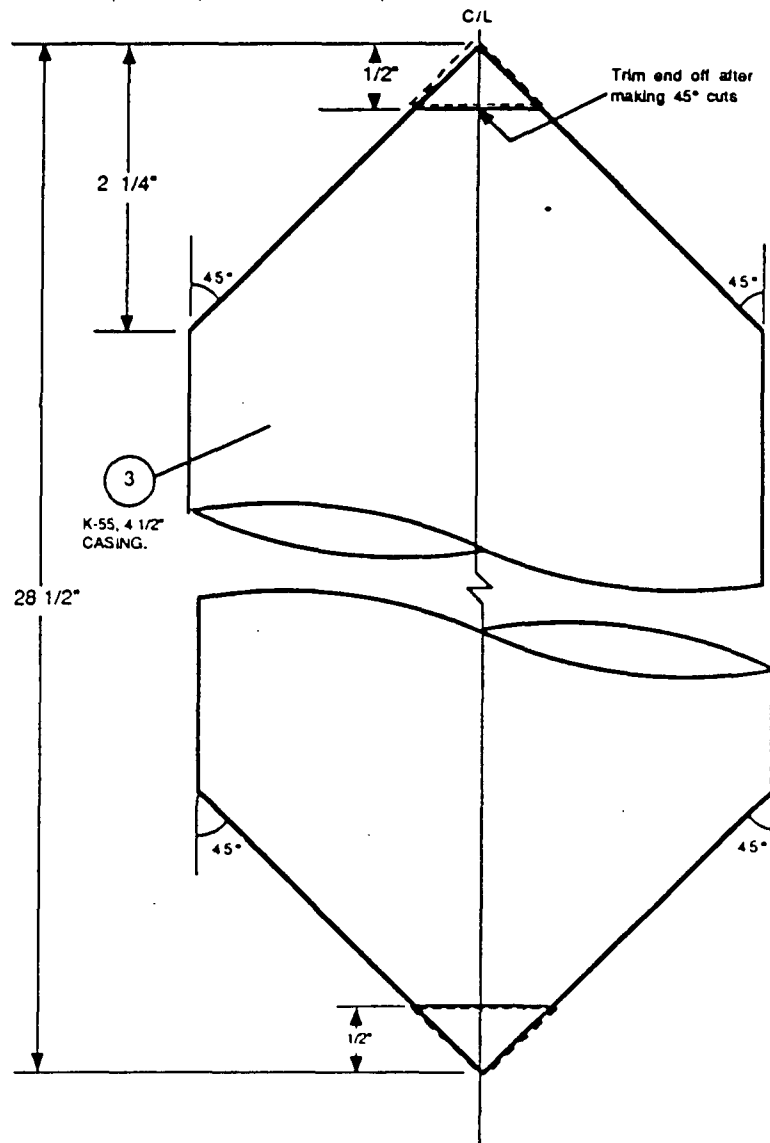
Details of dimensions to cut pipe for welding.
